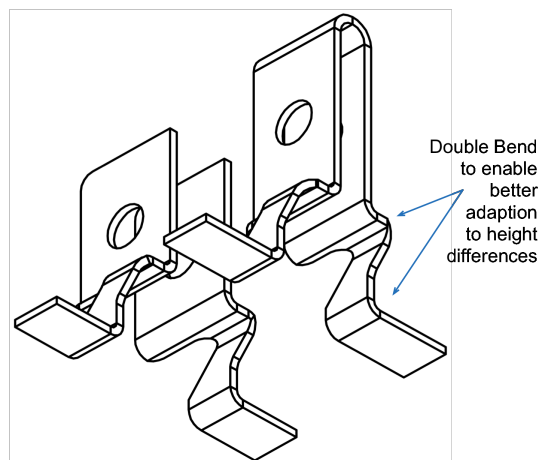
Adding a double bend in the contact spring assembly allowed the cutting process to straighten the contacts without having the risk of damaging the fixation on the assembly
